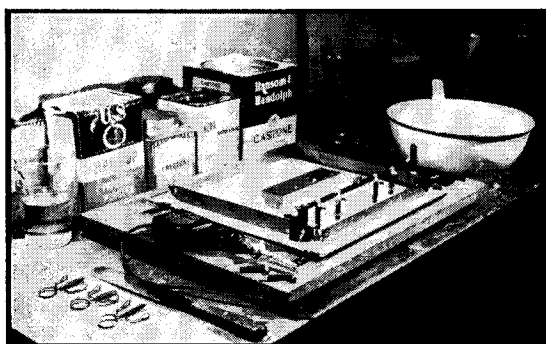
Preparation for slab-casting. The brass containing fence or mold rests on plate glass, which rests on the drawing on drawing board. Central metal core is in place, as are four metal tube inserts.
